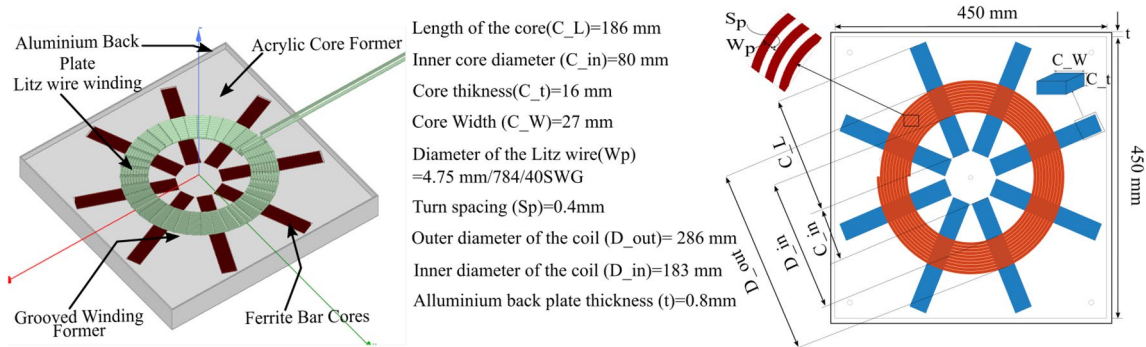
Schematic of Circular charging pad layout for IPT and dimensions
